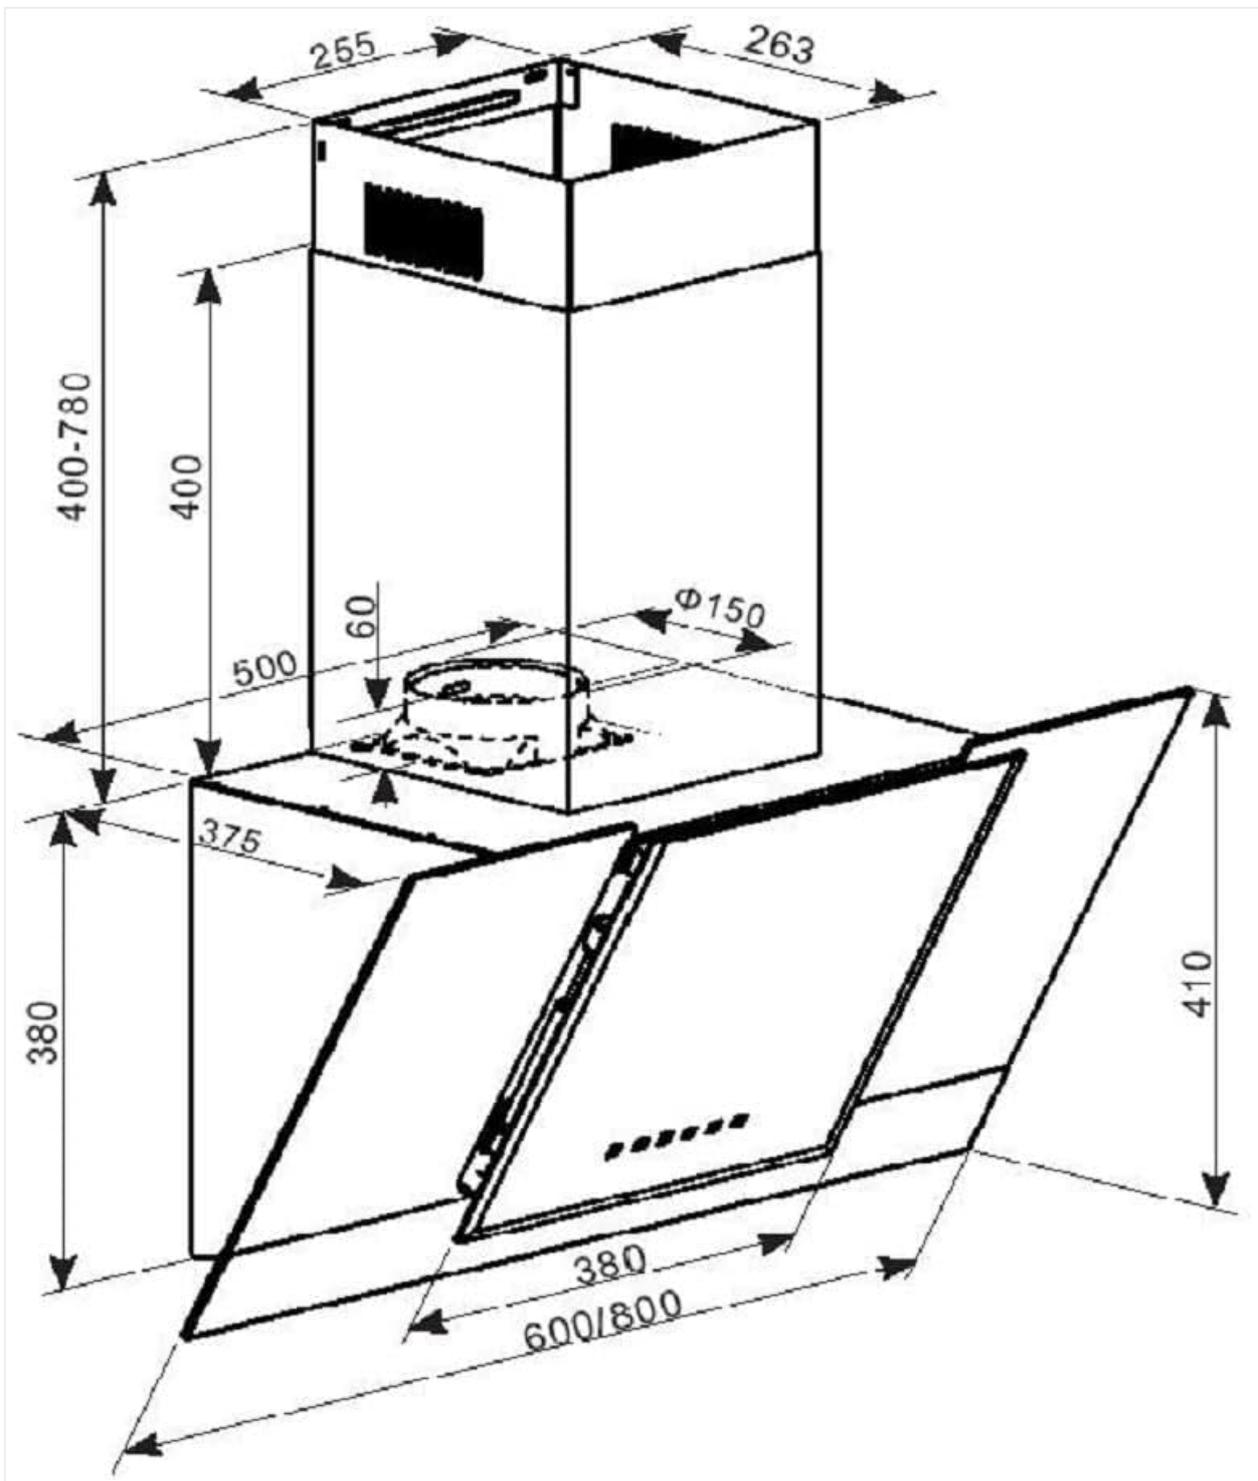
Installation dimensions for the Kaiser AT 6438 F ECO Extractor Hood. This diagram illustrates the hood's dimensions and recommended mounting heights, including the 150mm ducting diameter.
